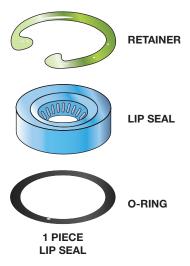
Some newer compressors use a stationary lip seal that seals against the rotating shaft.
